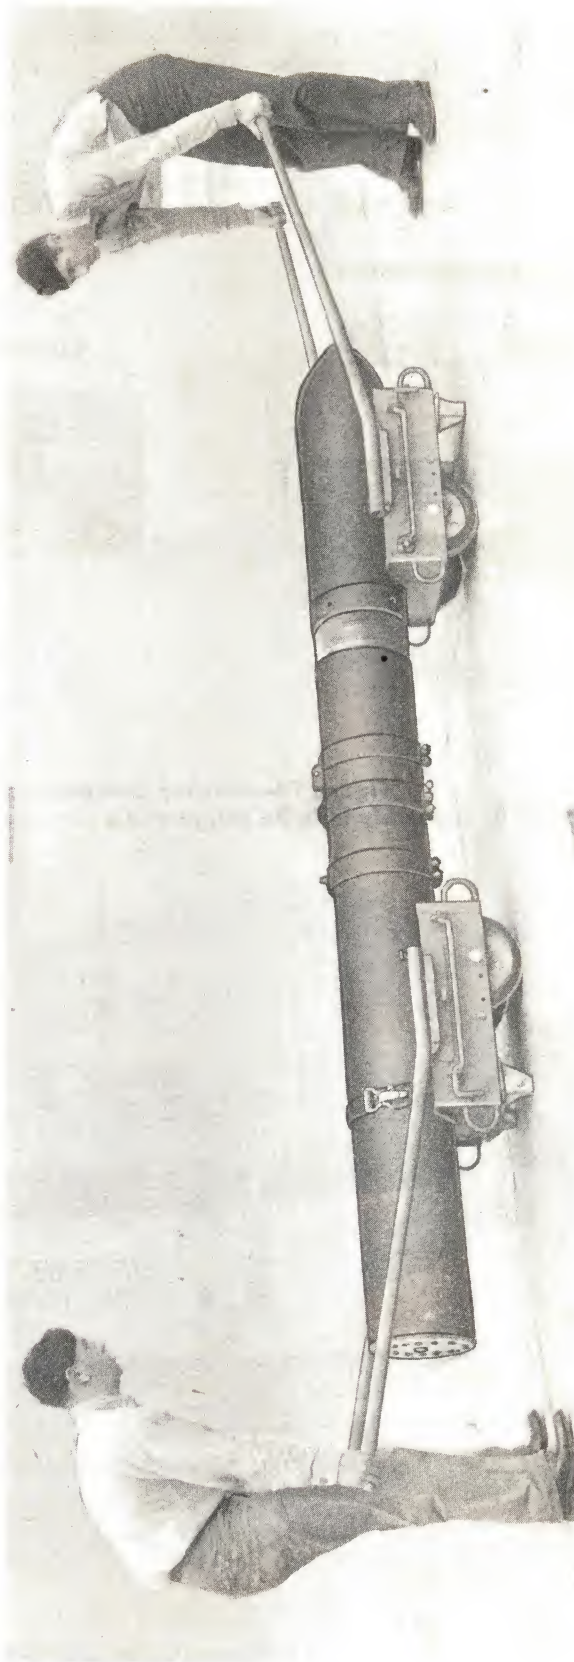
First Step in Assembling Head and Motor Using Two Bomb Skids Mk 1 Mod 1
